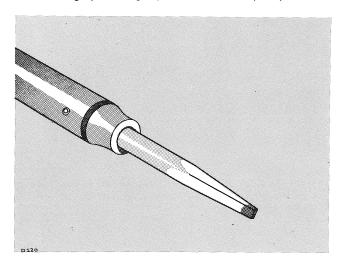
Soldering iron tip properly shaped and tinned.
